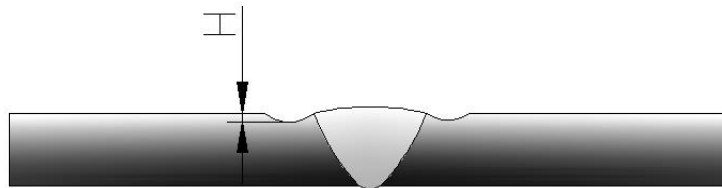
Reduction in thickness due to the welding process (undercuts)
